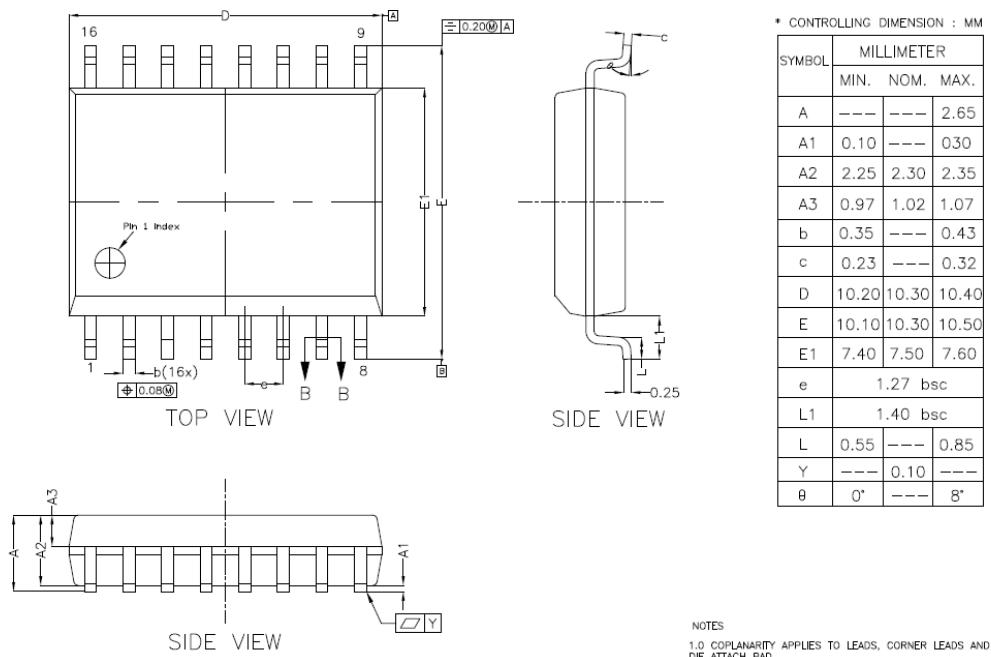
SOP16(300mil) Package Shape and Dimension in millimeters
